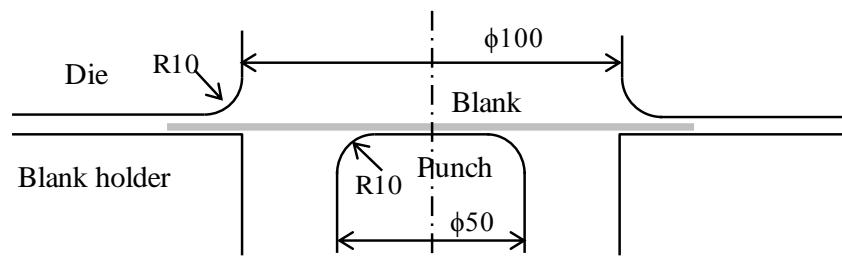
Cross-sectional profile of the tool used for the investigation of the blank holding method
